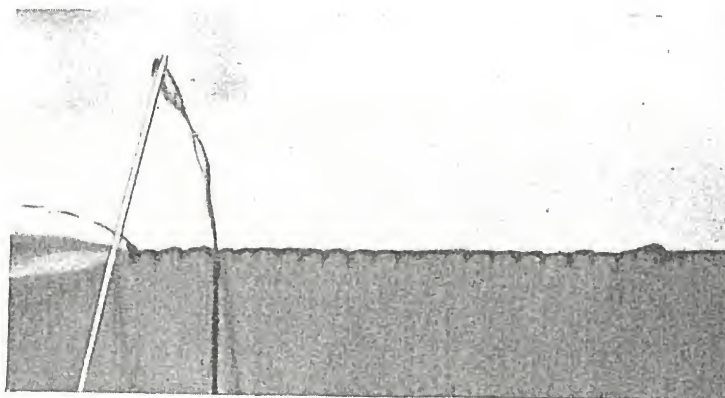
FABRIC ENVELOPE—EDGE SEWING AND THREAD KNOTTING
